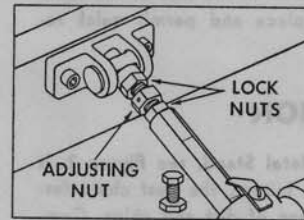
To adjust fence perpendicular to table, loosen tilt gauge lock nuts and turn adjusting nut.
